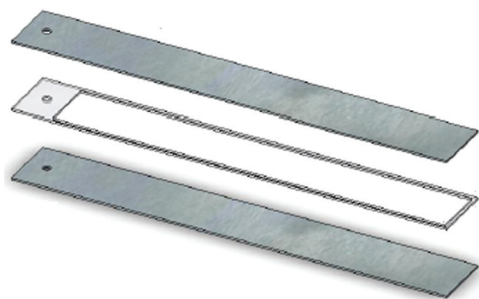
Sketch of a sandwich beam structure (Lara-Prieto et al., 2010).
